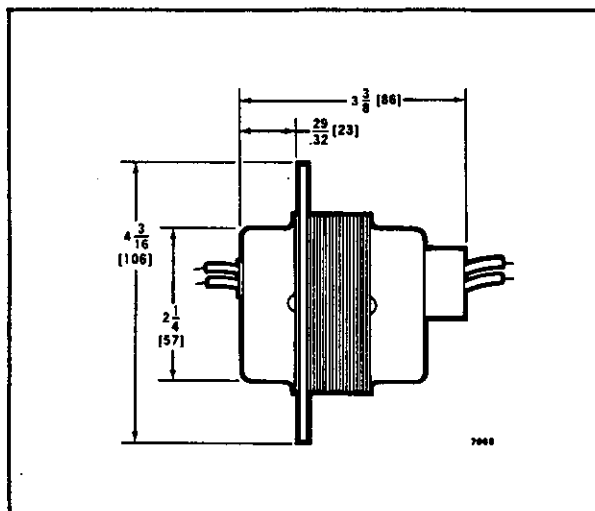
AT72D DIMENSIONS IN in. [mm IN BRACKETS] WITH CONDUIT SPUD ON SECONDARY.
